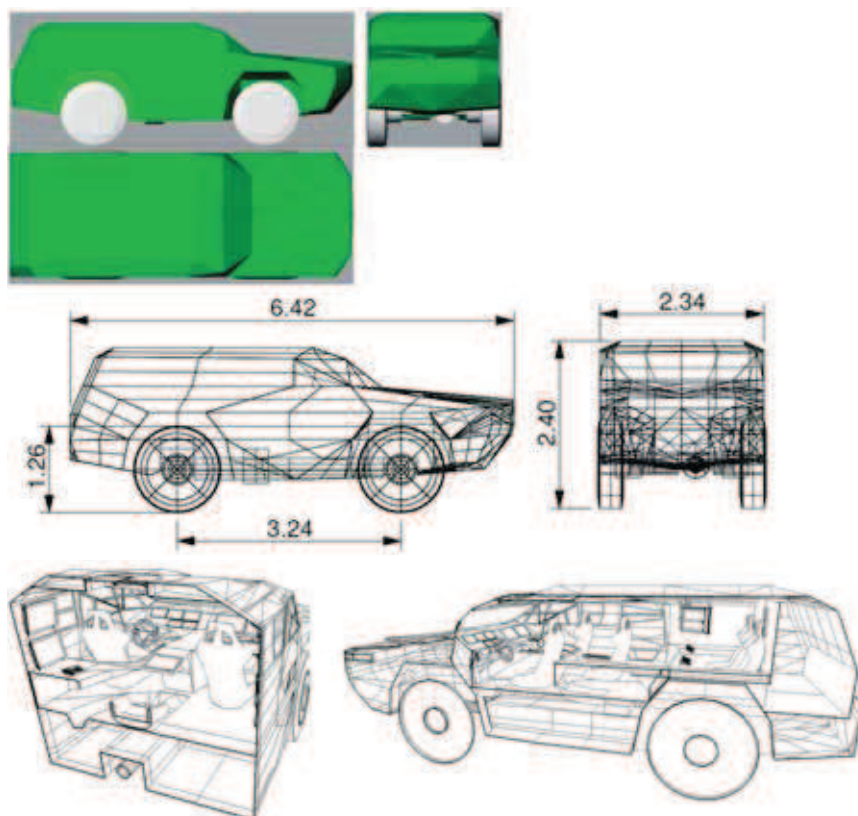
General view, cross-section, and overall dimensions of the vehicle shape
